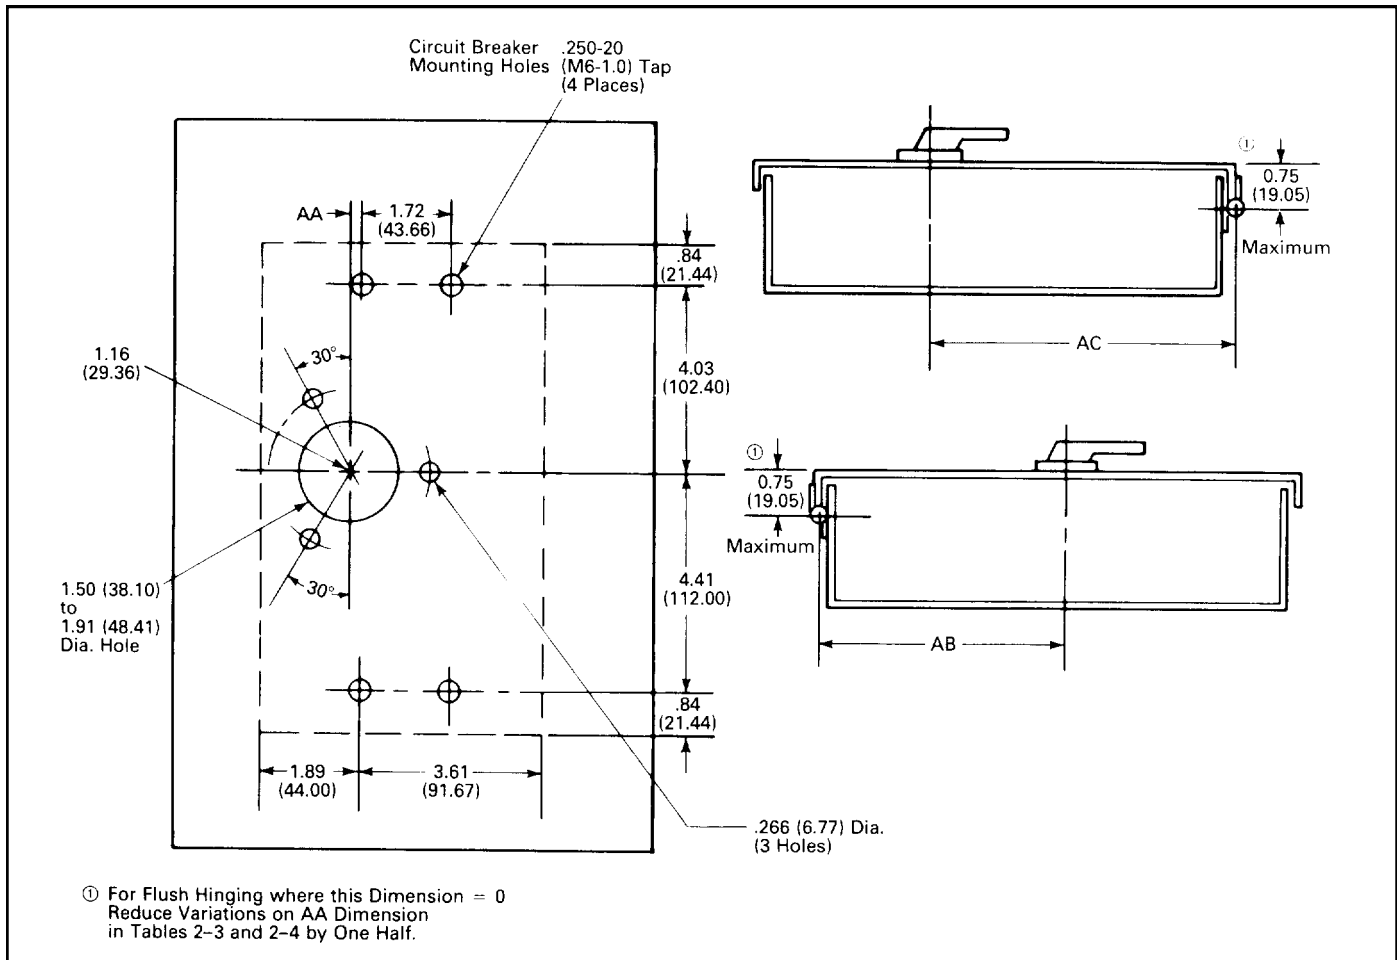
Enclosure Drilling Plan, K-Frame Series C Circuit Breaker
